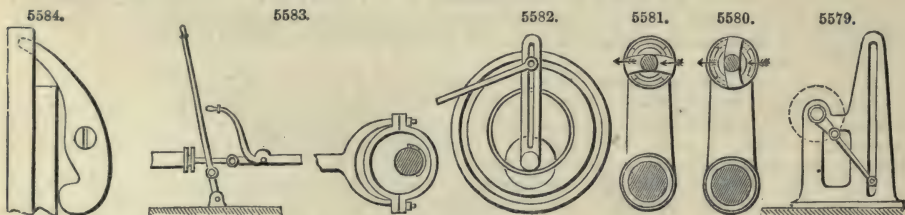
Reversing gear for a single engine. On raising the eccentric-rod the valve-spindle is released. The engine can then be reversed by working the upright lever, after which the eccentric-rod is let down again. The eccentric in this case is loose upon the shaft, and driven by a projection on the shaft acting upon a nearly semicircular projection on the side of the eccentric, which permits the eccentric to turn half-way round on the shaft on reversing the valves.
